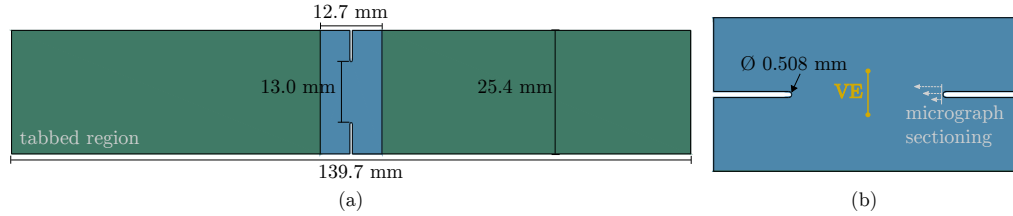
(a) Geometry and dimensions of the DENC test article, (b) detailed view of the gage section.
